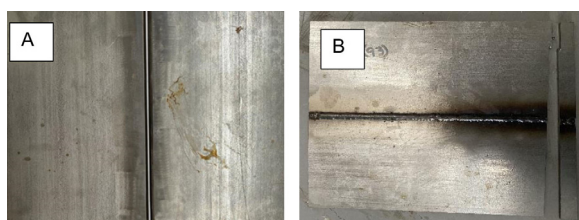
Non-stabilized FSS plates prior to welding (A) and after welding (B)
